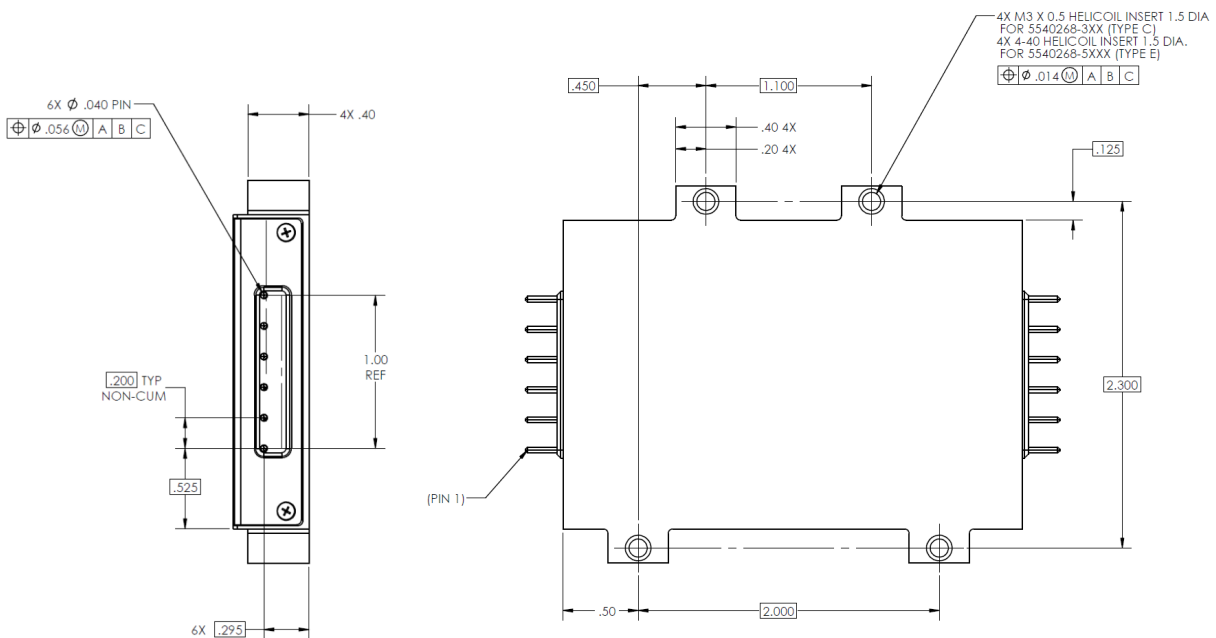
Axial Pins and Threaded Tabs Package Bottom View (-C or -E)
